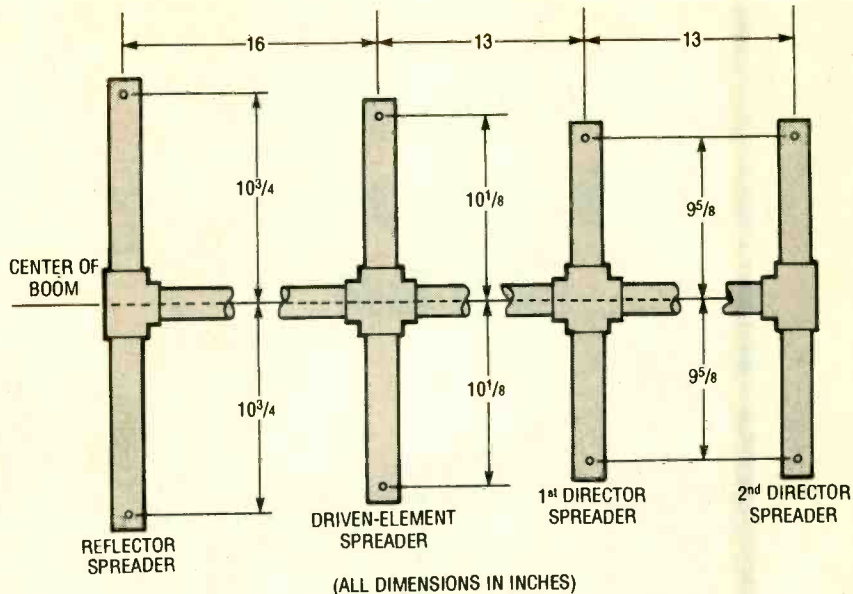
This is the boom/spreader assembly for the quad antenna. Note that the locations of the holes are measured from the center of the boom.
